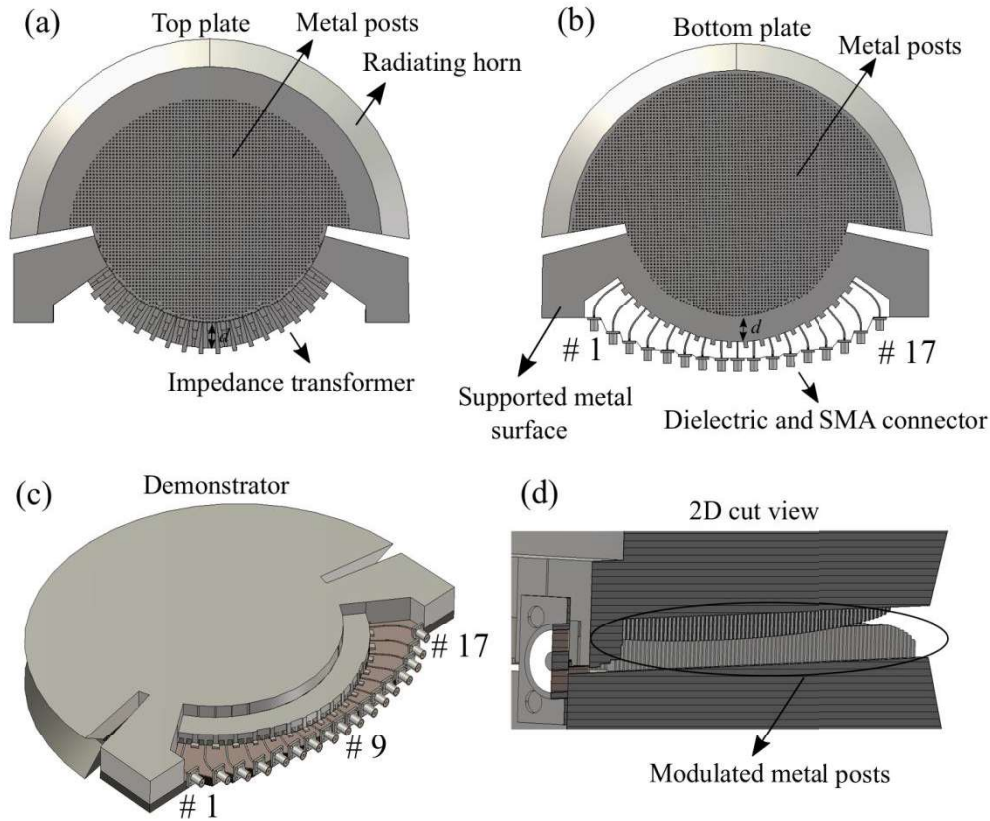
Final demonstrator, (a) top plate, (b) bottom plate, (c) perspective view of both plates, (d) 2D cut view for broadside orientation.
